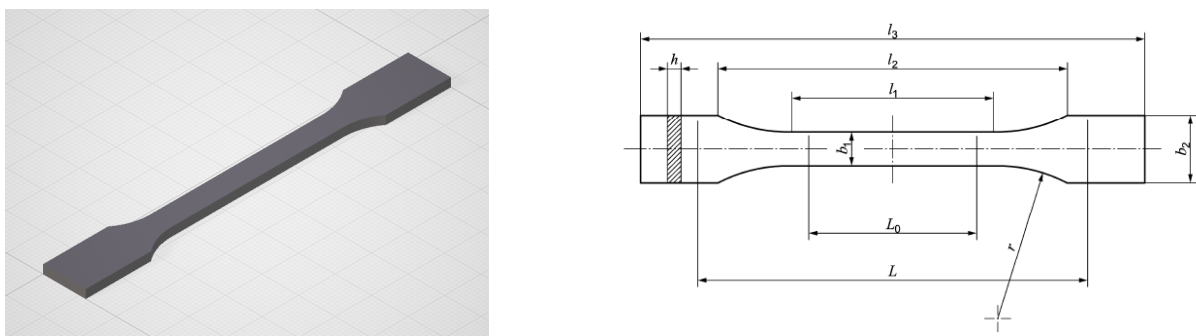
Standard test specimen Type 1A in DIN EN ISO 527-2 (DIN, 2012) : (a) 3D model (left) and (b) technical dimensions (right)
